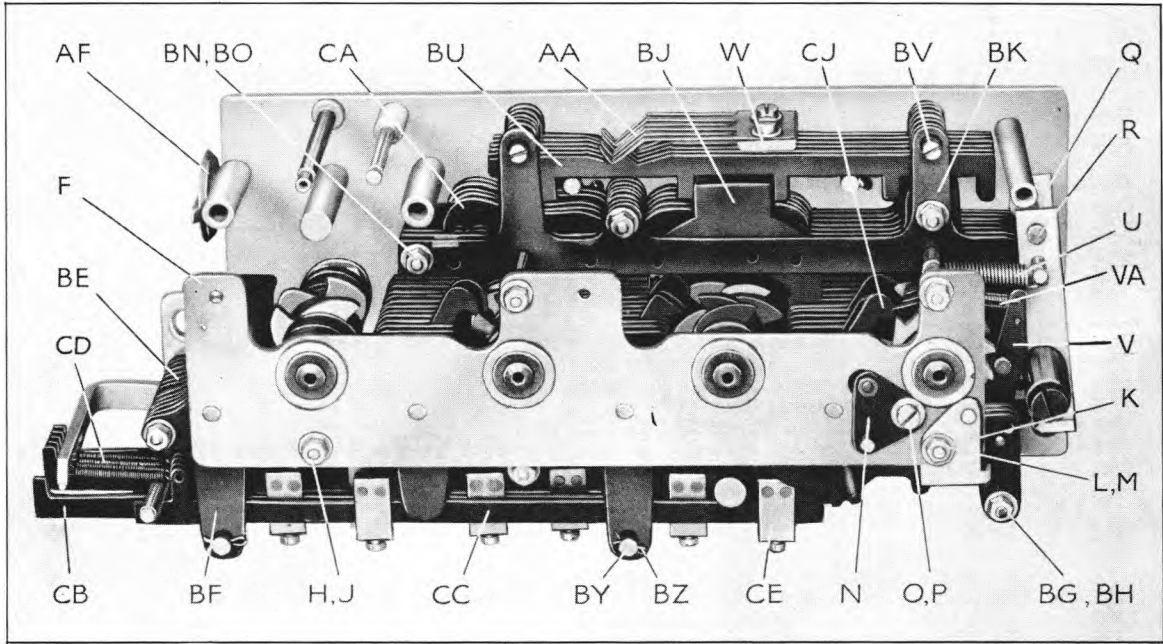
TRANSFER UNIT S1942 (For C.T. Keyboards)
